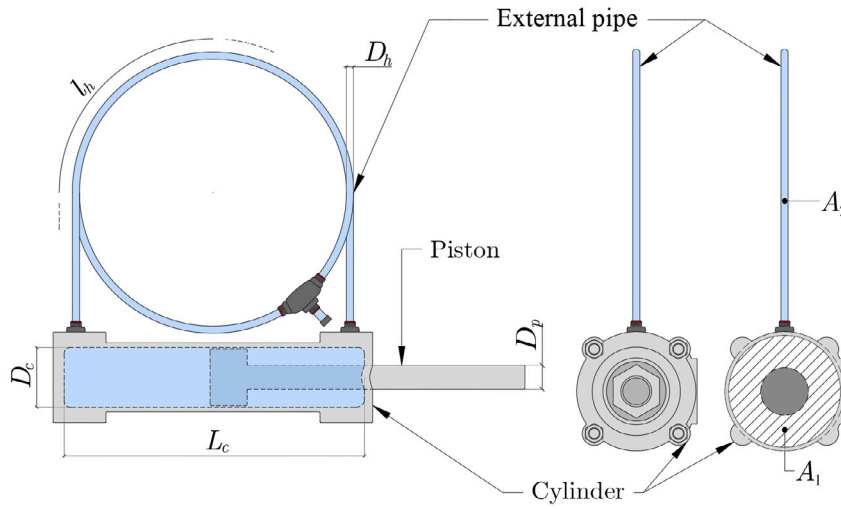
Sketch of the side and front view of the small-scale prototype of the hydraulic inerter.
